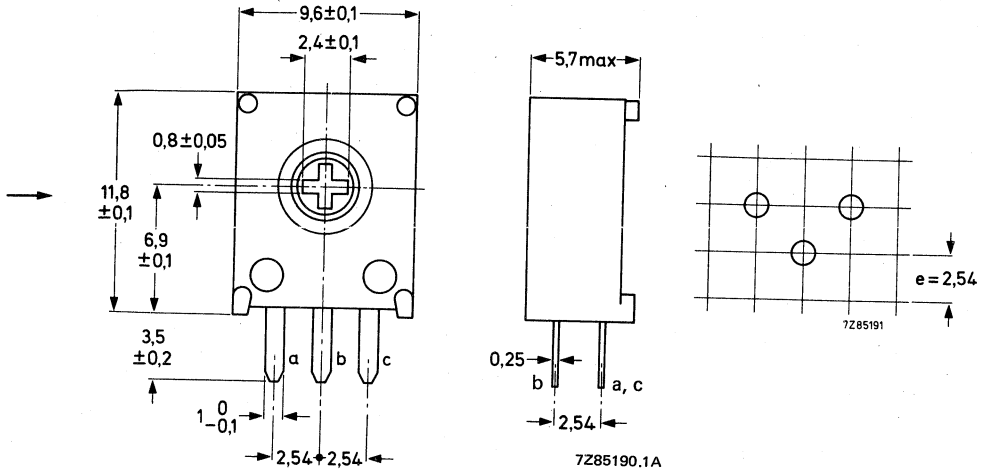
Vertical mounting, version with cross-shaped recess (non-insulated hot wiper, b).
